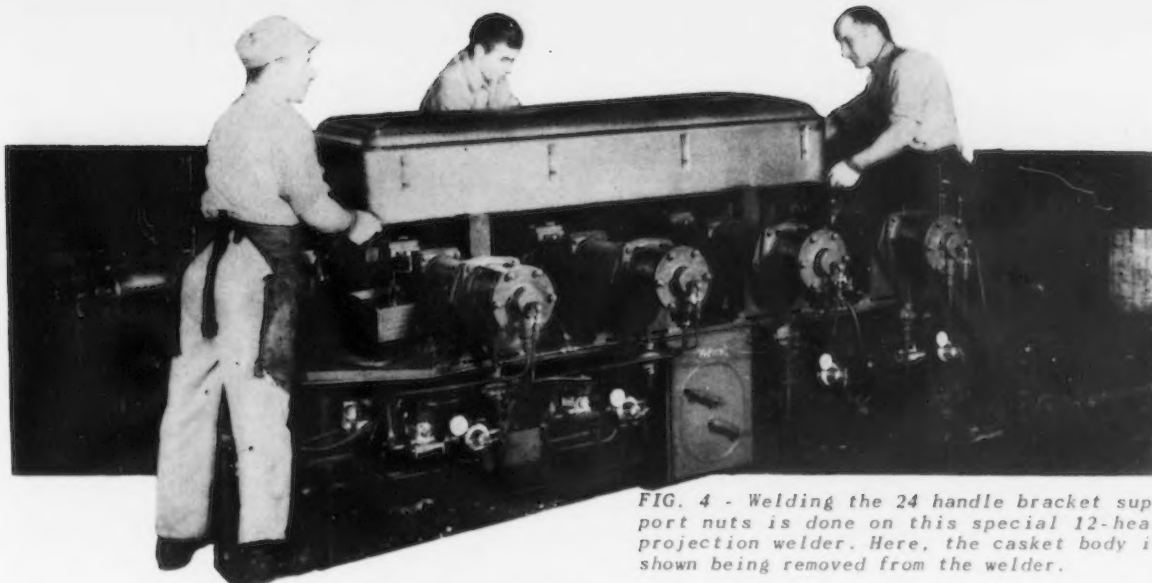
Welding the 24 handle bracket support nuts is done on this special 12-head projection welder. Here, the casket body is shown being removed from the welder.
